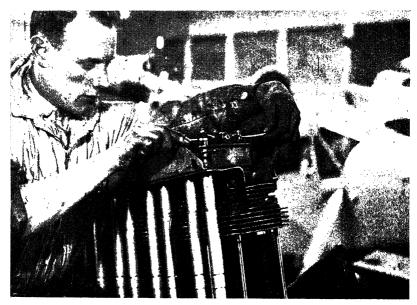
Adjust valve clearance (" gipsy ii ")
